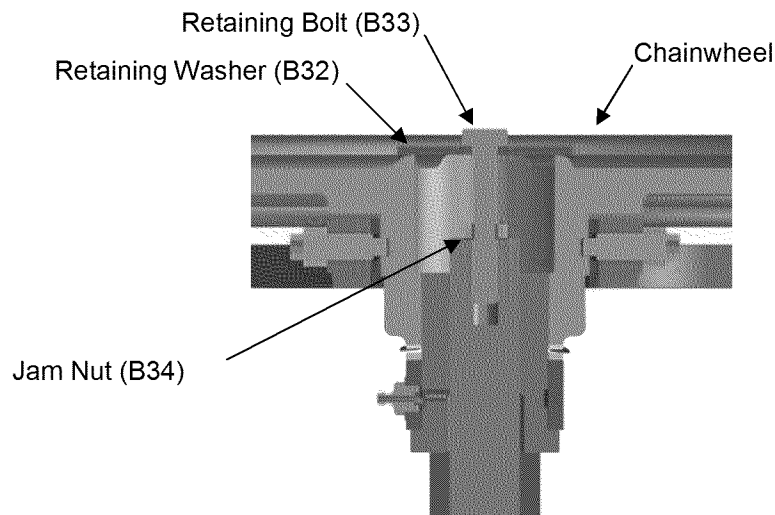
Detailed View of Chainwheel Retaining Components on 2-12" Valves
